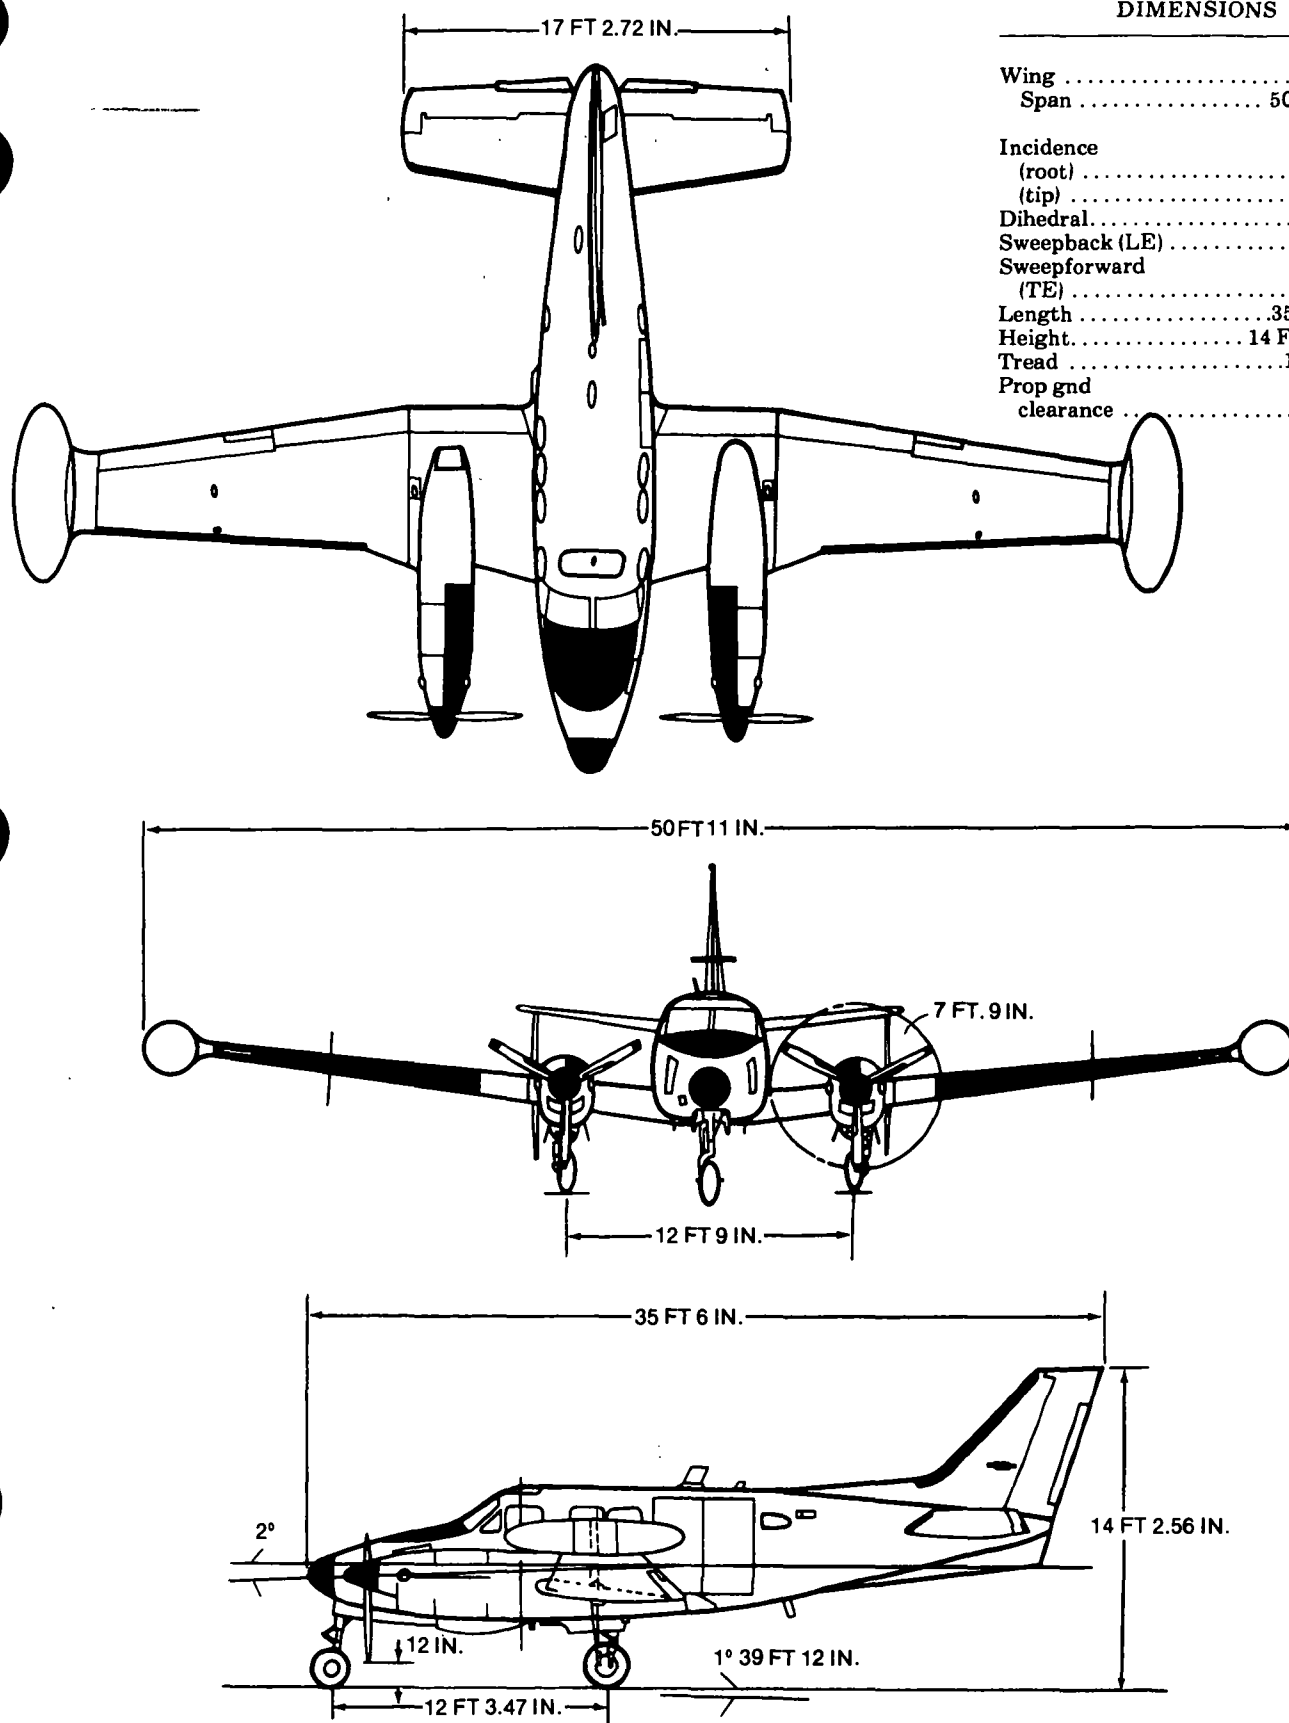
Principal Dimensions RU-21H (Guardrail V)
